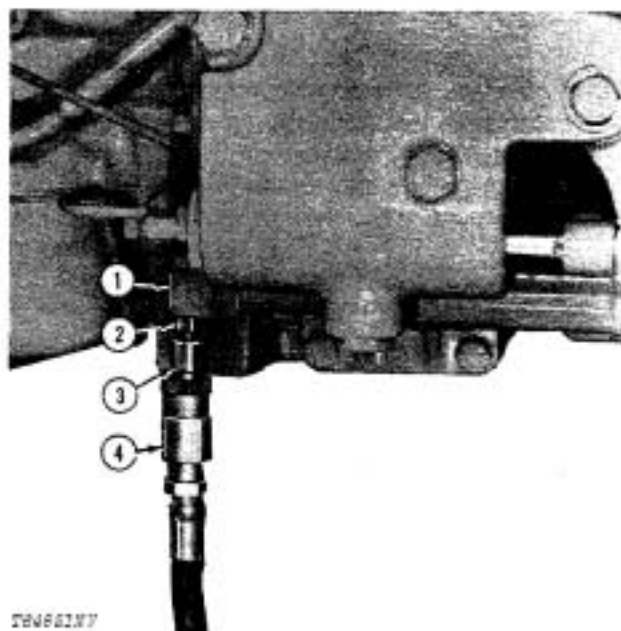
Reverser System Pressure (Transmission Pump Outlet)
